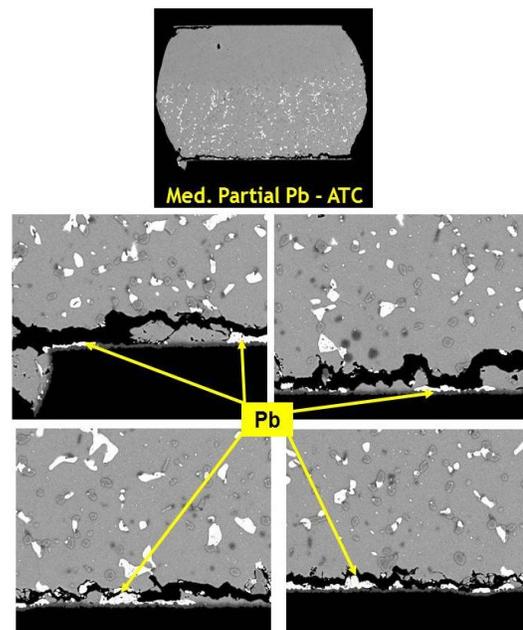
Backscattered electron images of thermal fatigue failures at the PCB side of the solder joint in the Medium Pb mixed leg. Note the Pb (bright white phase) accumulated at the soldered interface and along the crack path.
